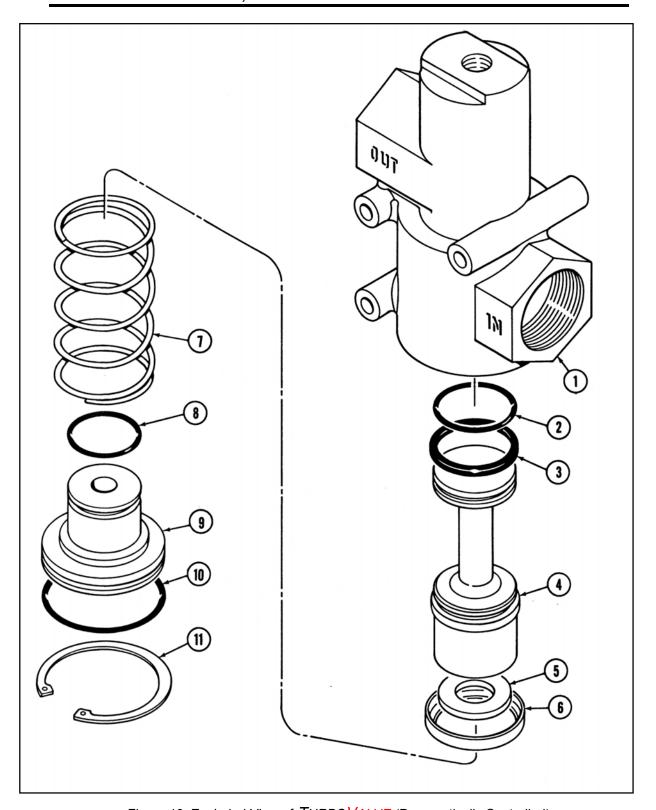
Exploded View of *TURBOVALVE* (Pneumatically Controlled)
